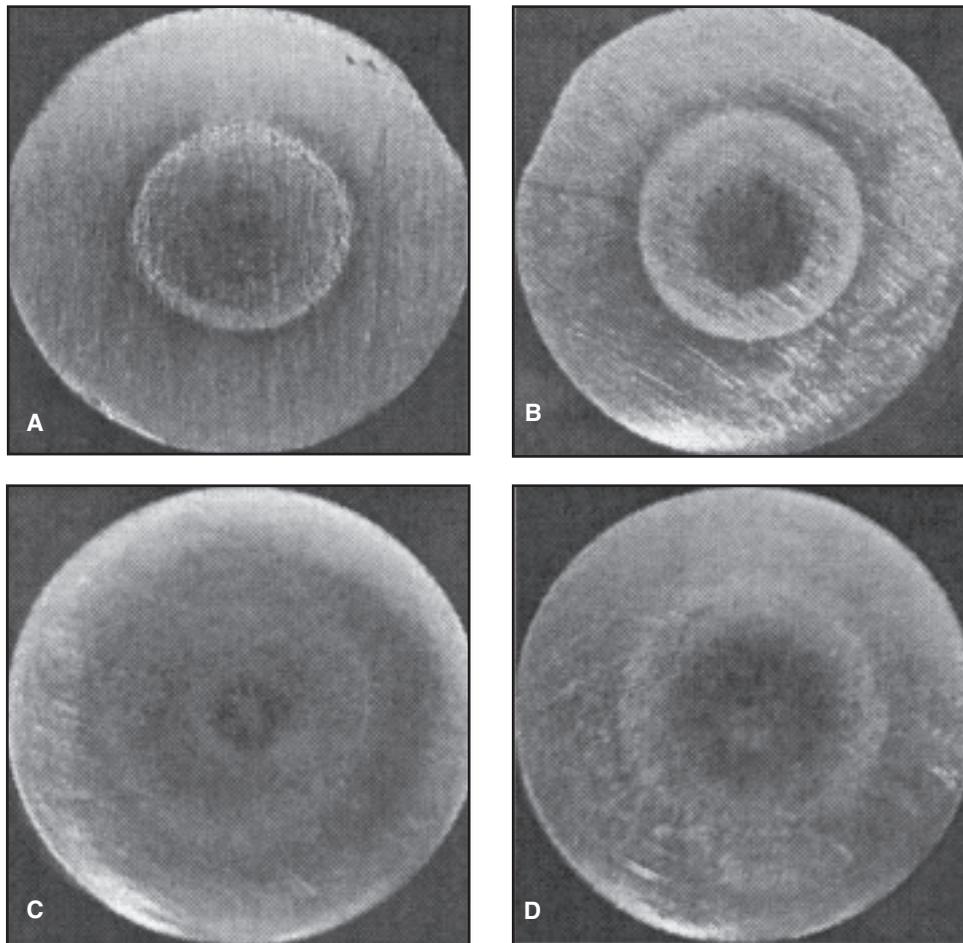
Electrode surfaces after making 60 welds on sheets of different surface conditions. A — Chemically cleaned; B — degreased; C — electric-arc cleaned; D — untreated.
